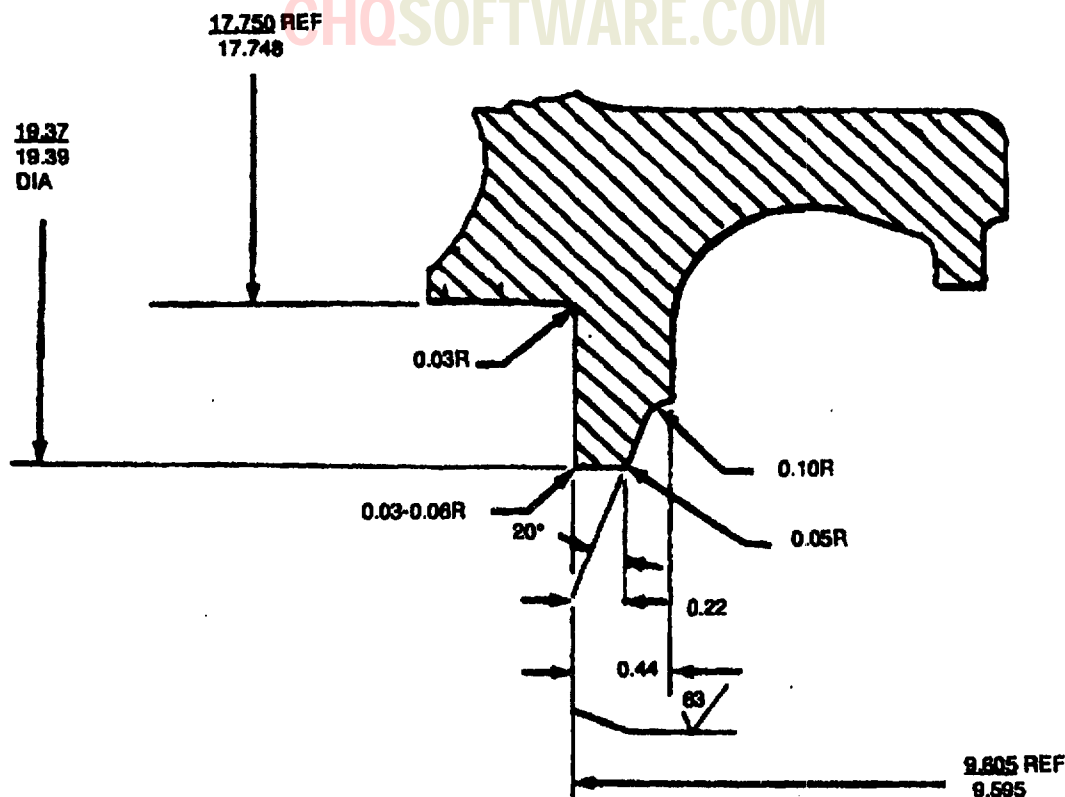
Machining of Weld Repaired Inlet Housing V-Band Area.
